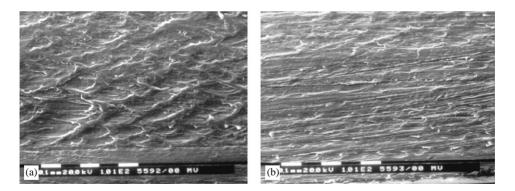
Machined surface morphology of LDPE at the cutting speeds of: (a) 1 mm/min; and (b) 20,000 mm/min.
